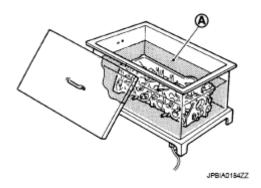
Heating Cylinder Head Courtesy of NISSAN MOTOR CO., U.S.A.
